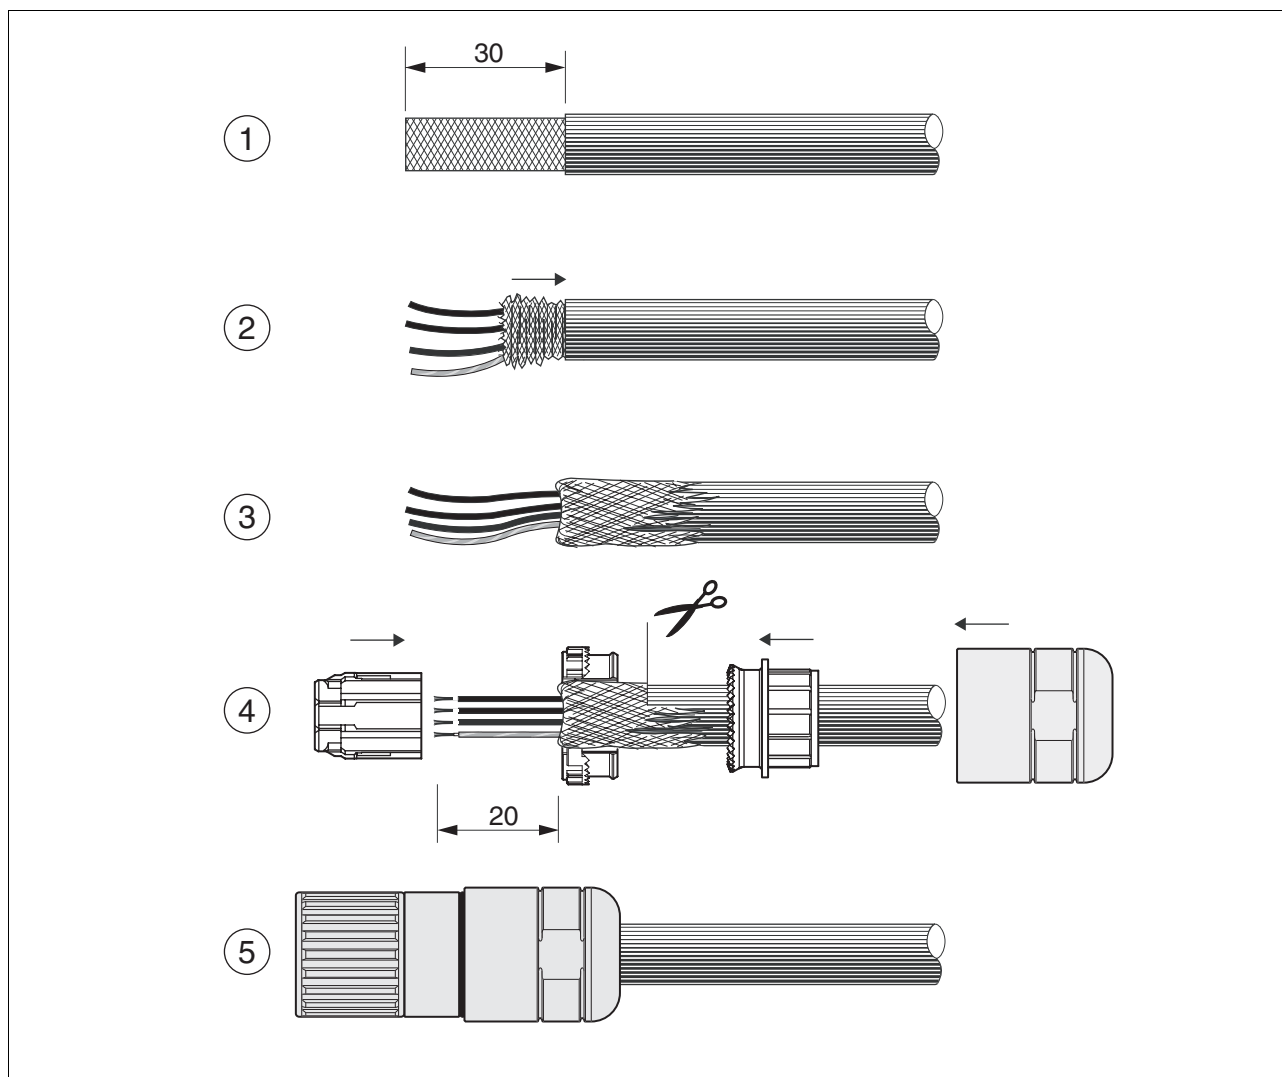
Assembly of the motor cable (same procedure for encoder cable)
